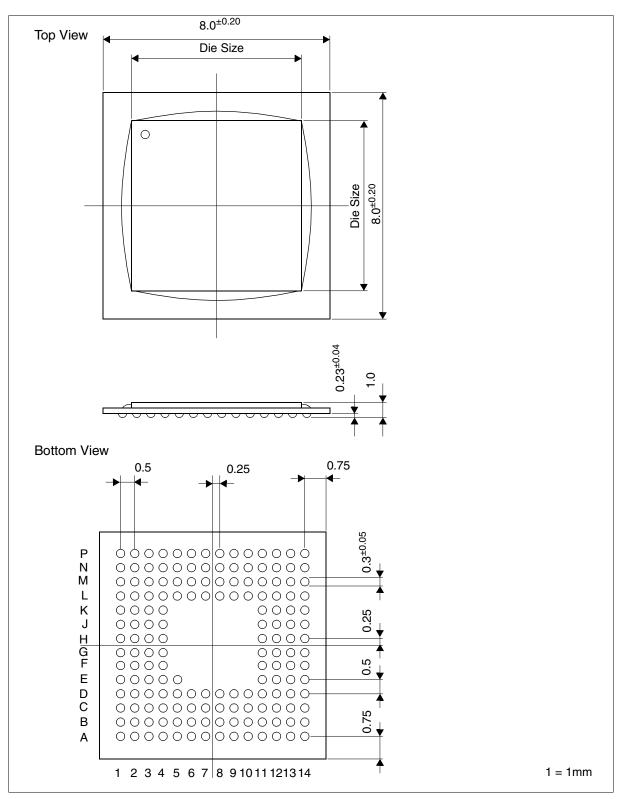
S1D13715 FCBGA 160-Pin Package
